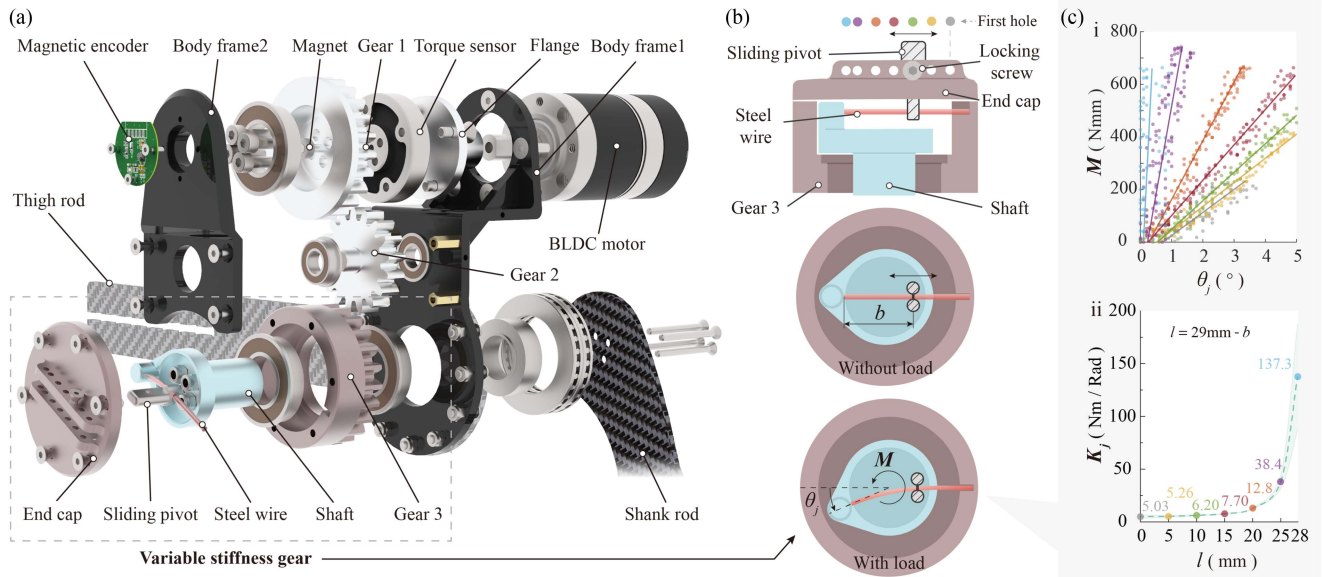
Mechanical characteristics of the backdrivable VSA. (a) Exploded view of the VSA. Assuming the thigh rod is fixed, extension and flexion of the knee are transmitted through the shank to the shank rod. This movement drives variable stiffness gear and ultimately back-drives the motor with a reduction ratio of 1:1. (b) Variable stiffness gear based on variable length flexure. Seven pairs of threaded holes are arranged linearly to enable the selection of seven different stiffnesses. The centerline distance between the sliding pivot and the steel flexure's end is denoted as b , and $l = 29 \text{ mm} - b$ is the centerline distance between the sliding pivot and the first hole on the right (gray point). The steel flexure's end is connected to the driveshaft. (c) Stiffness characteristics of the VSA. Different colored threaded hole selections in Fig. 2(b). (i) Torque vs. angular displacement ($M - \theta_j$) at different stiffnesses. (ii) Stiffness versus centerline distance ($K_j - l$) curve.
